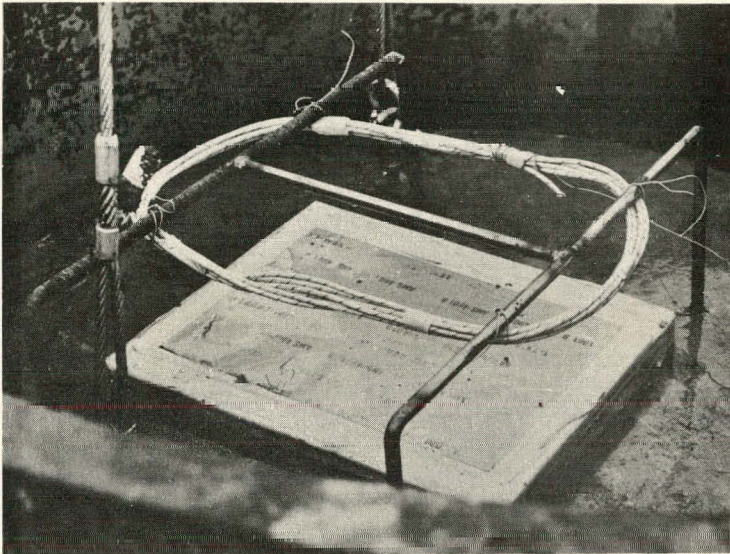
Arrangement for explosive forming under water of air duct panels for the Iroquois Engine. Shown are the die, blank and primacord charge (Courtesy Orenda Engines Ltd.)
